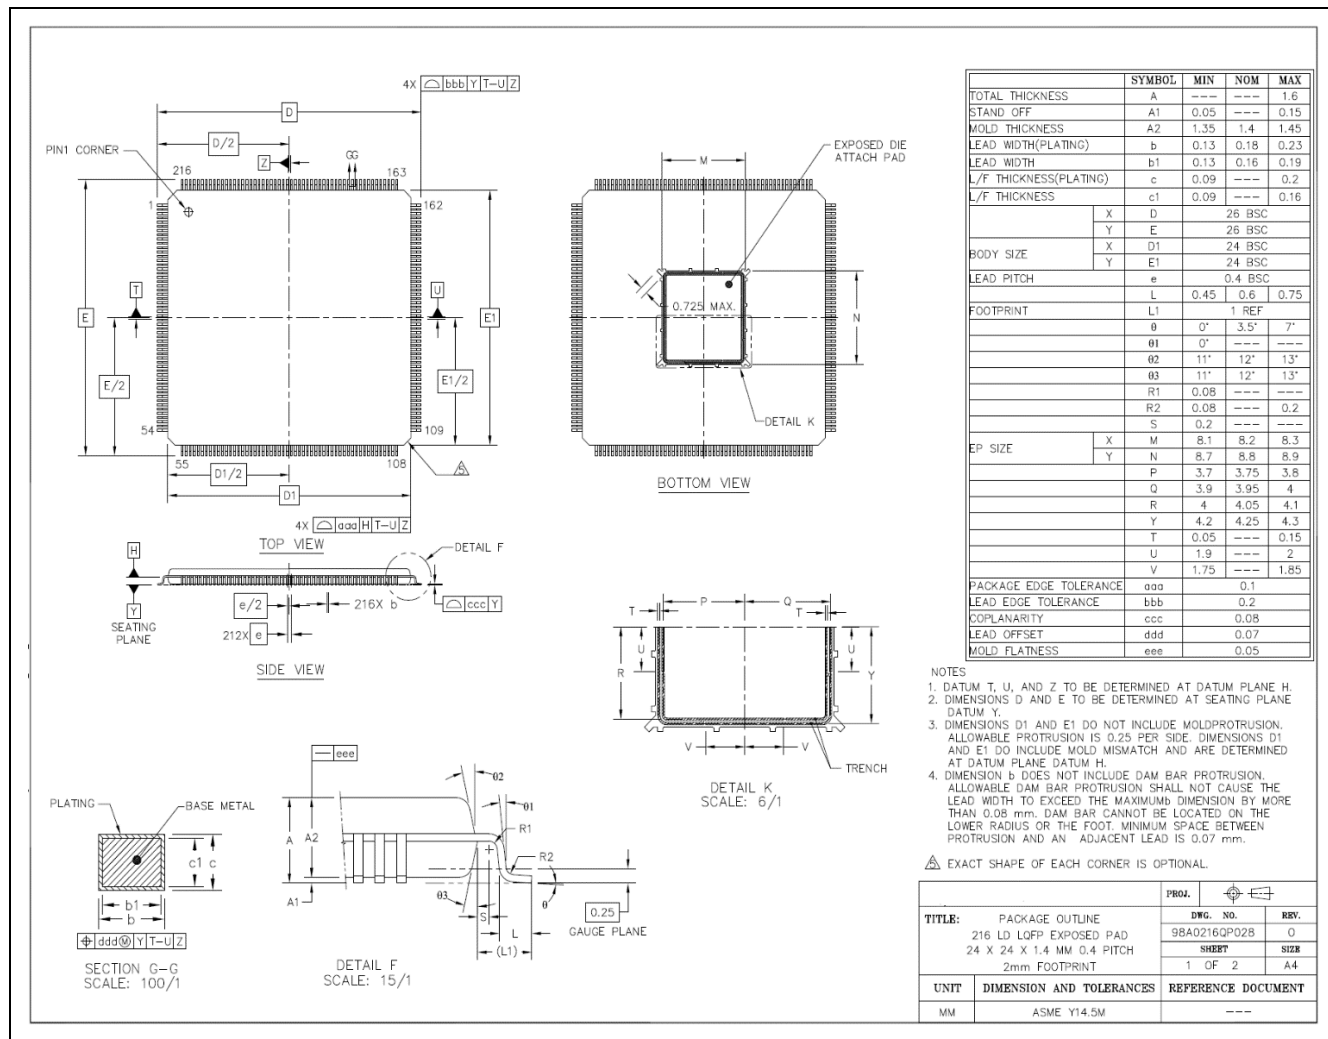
LQFP-EP 216-Pin Package Dimension
